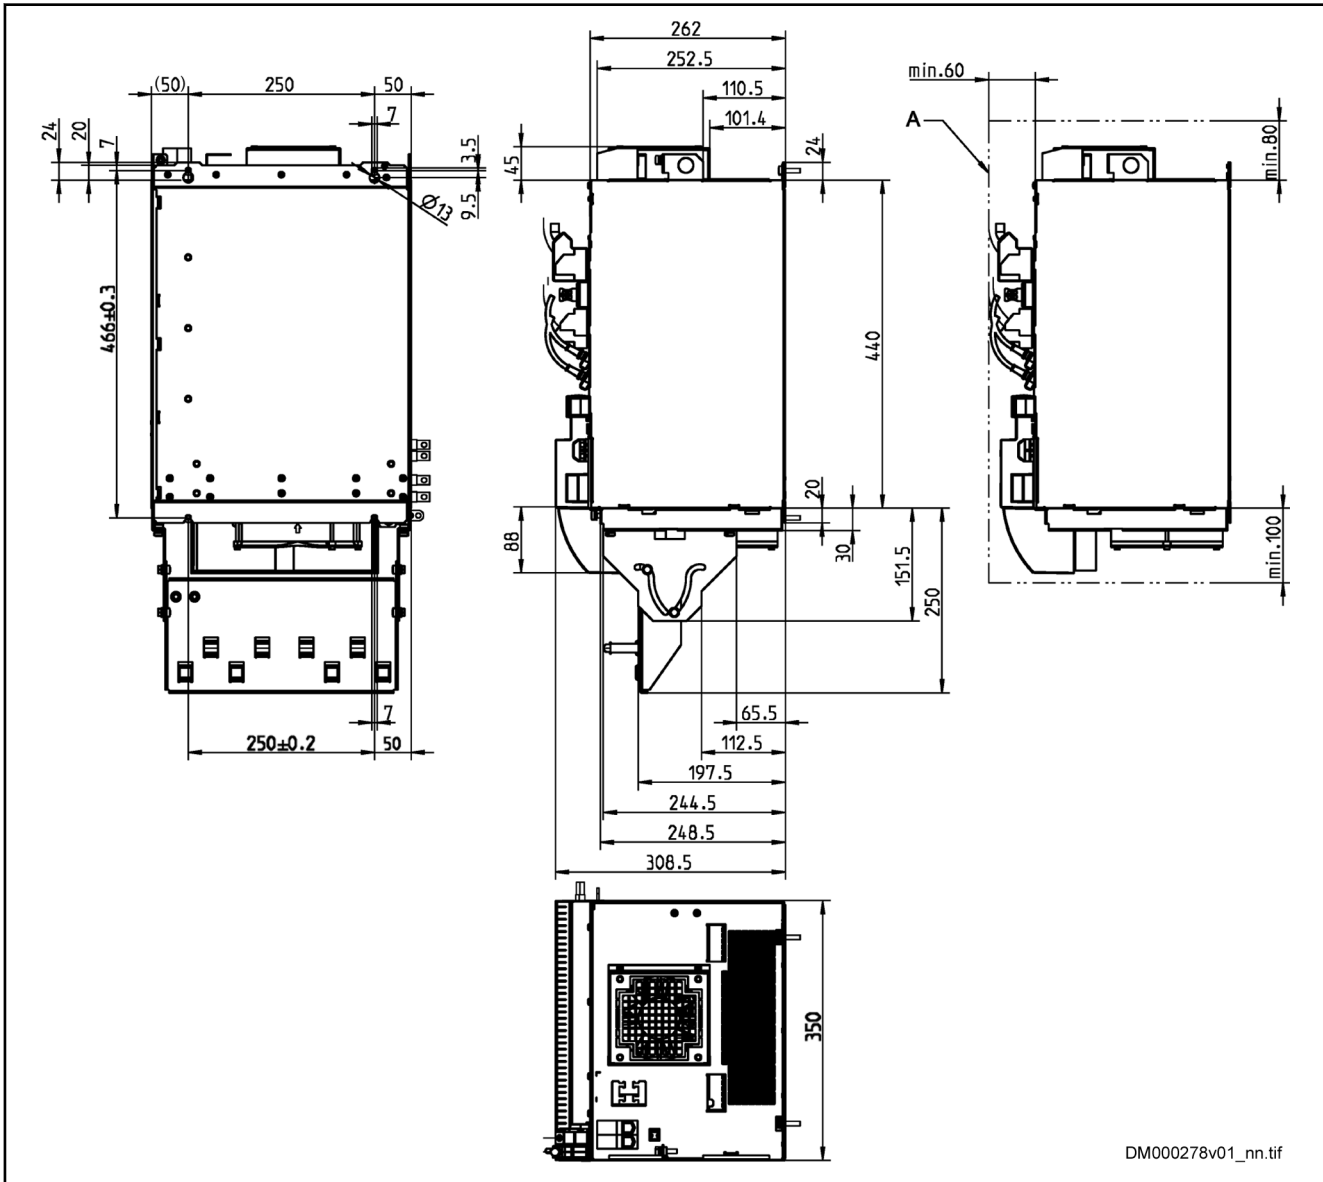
Dimensional drawing HCS03.1E-W0210 with HAS02
